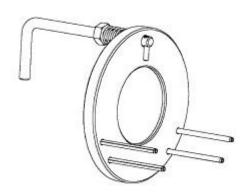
FIXTURE, ENGINE LIFTING - 8427 Courtesy of CHRYSLER LLC
